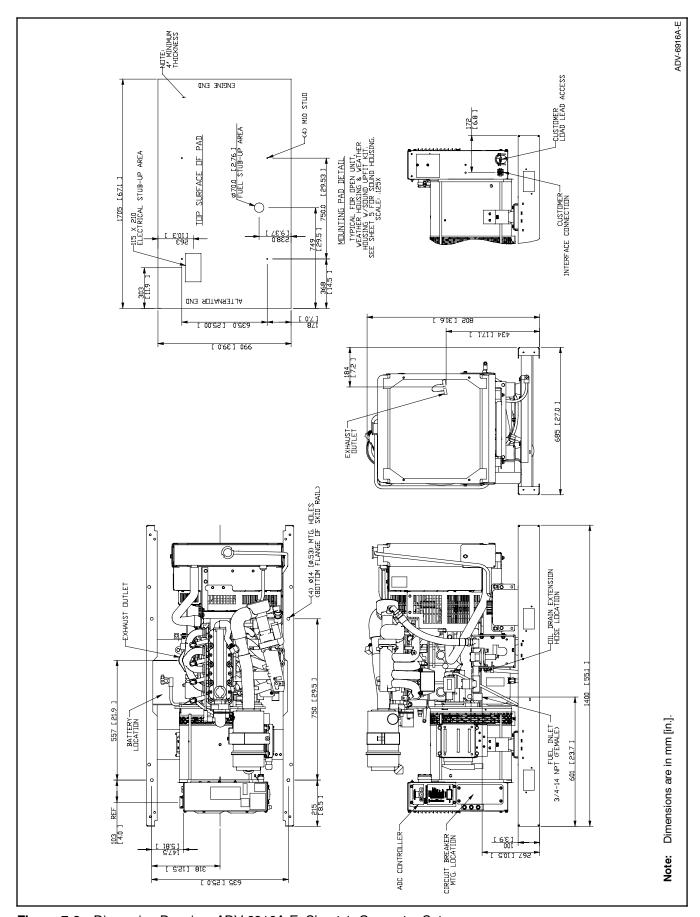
Dimension Drawing, ADV-6916A-E, Sheet 1, Generator Set
